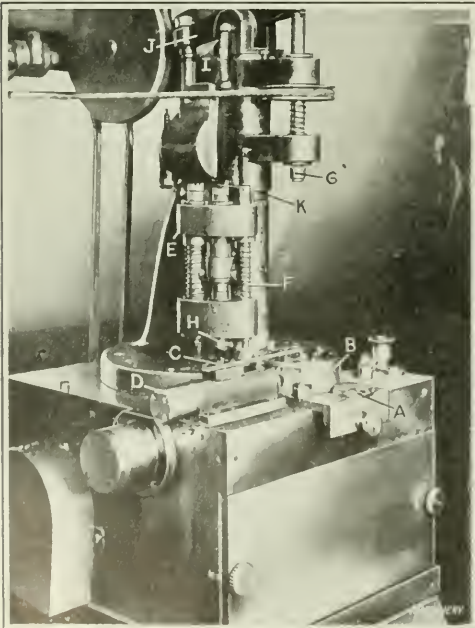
Machine used for turning and boring the Dome on Balance Cocks
